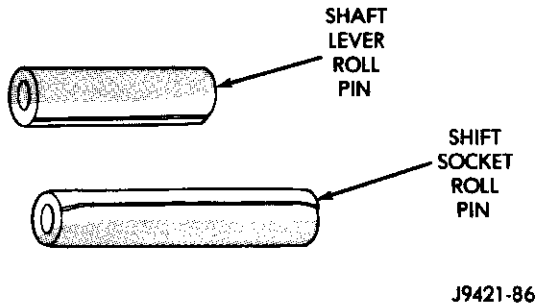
Roll Pin Identification—Shaft Lever And Shift Socket
